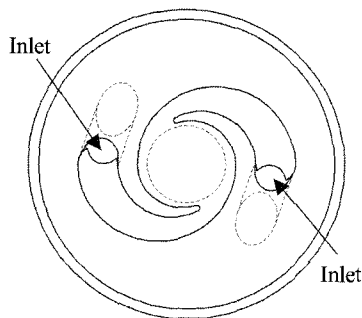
Bottom view of experimental nozzle core. - type 2 -
